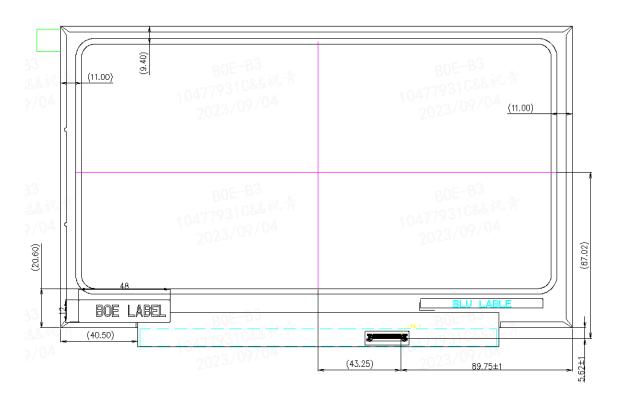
TFT-LCD Module Outline Dimensions (Rear view)
